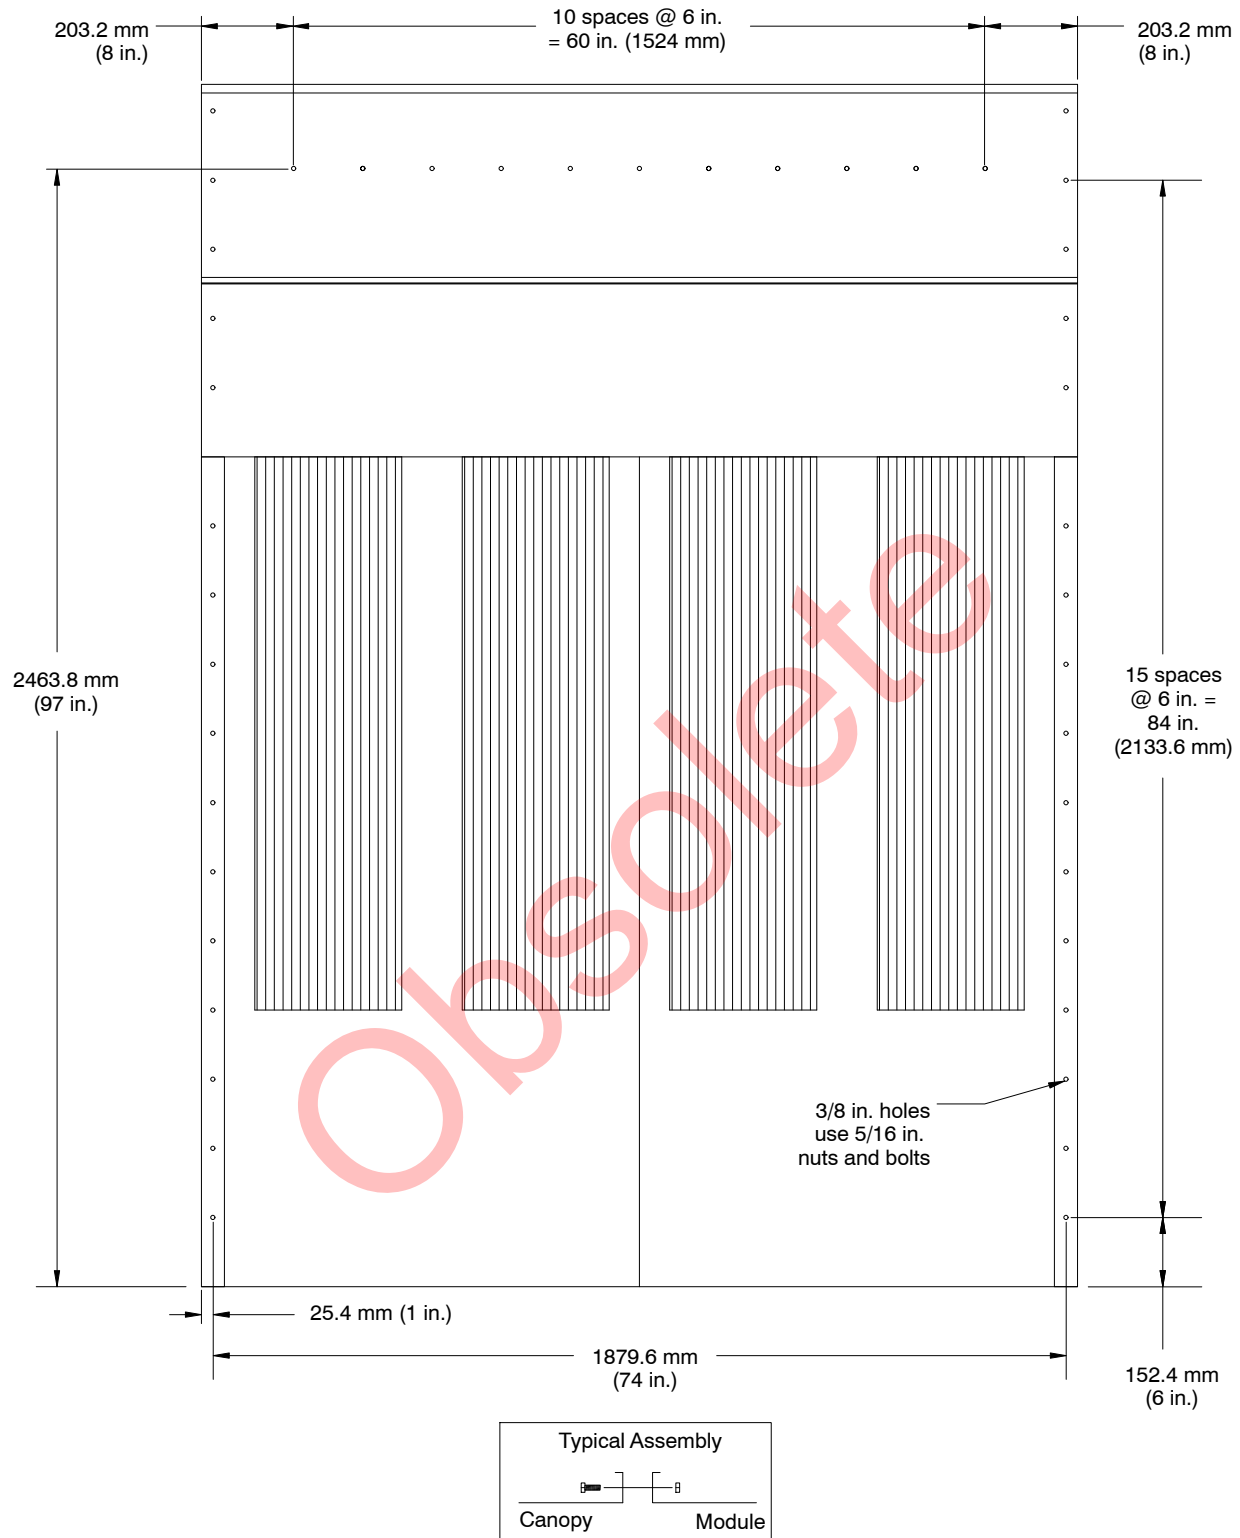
6,000 CFM Module to Canopy Mounting Dimensions
